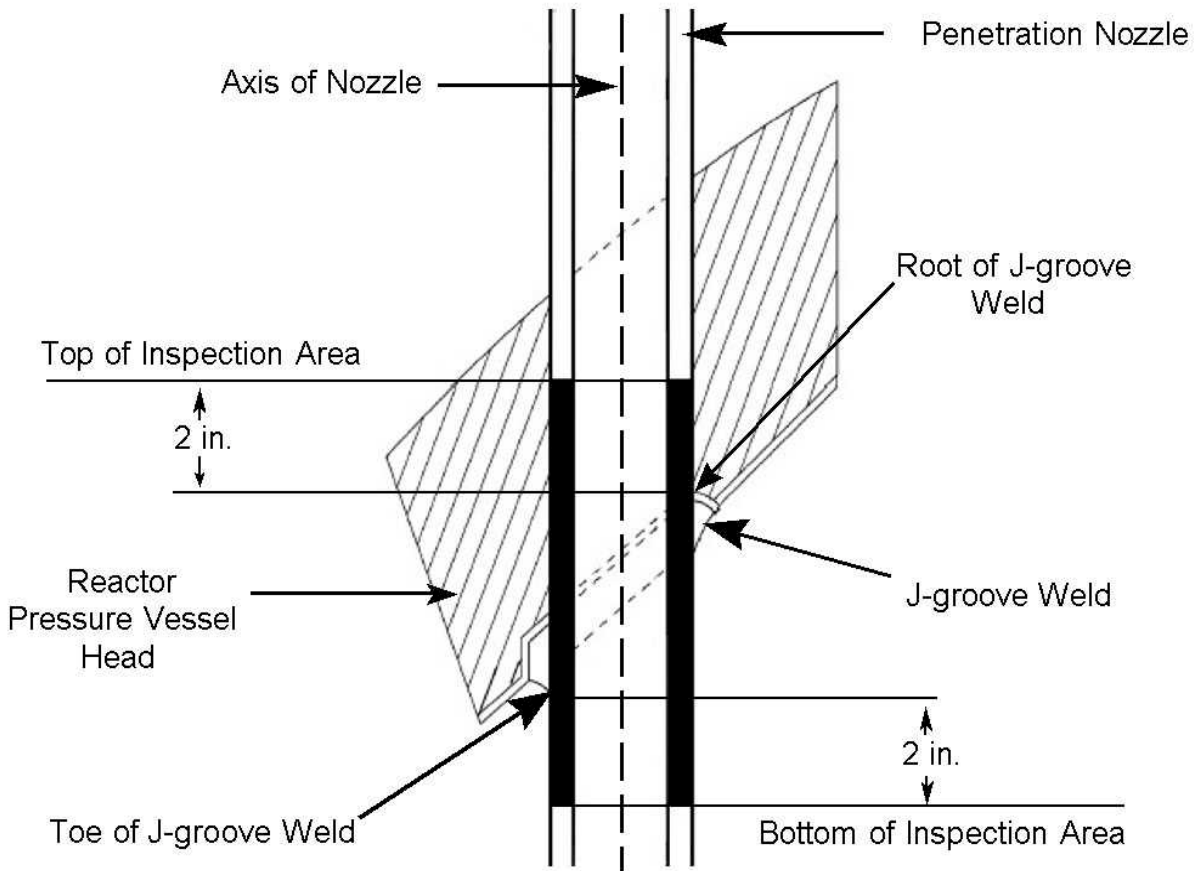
Inspection Area Using Ultrasonic Inspection Technique Without Stress Analysis
